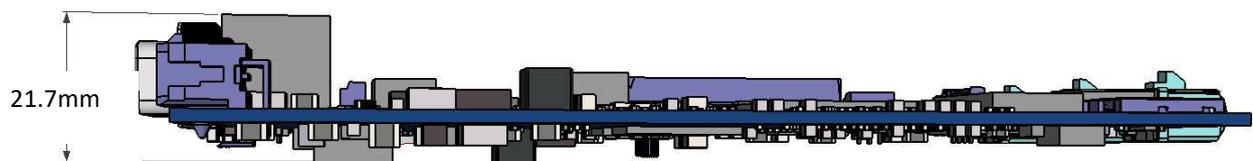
SIDE VIEW WITH MAXIMUM CONNECTOR HEIGHTS
